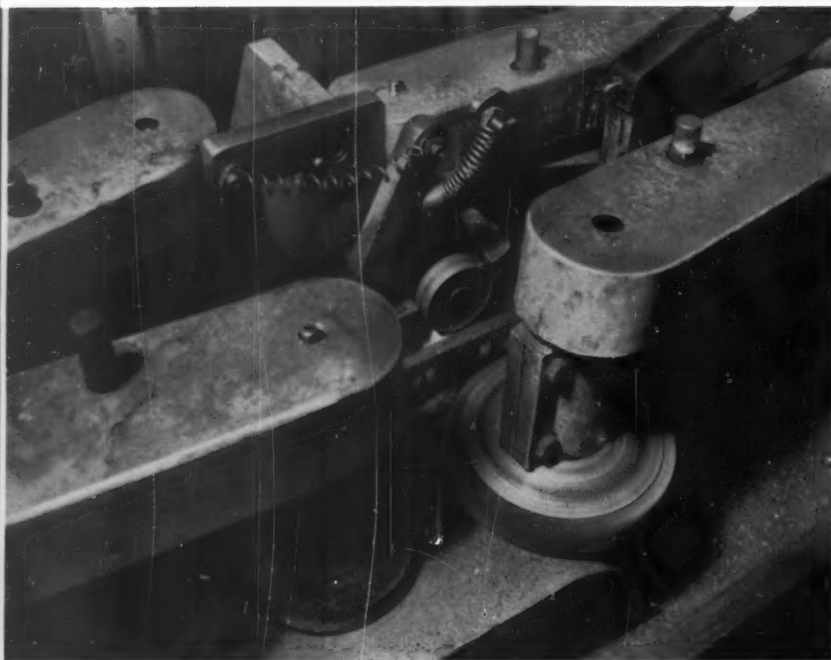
Burrs formed on one end of spline teeth in preceding broaching operation are automatically removed by wire-brushing in this special machine.
